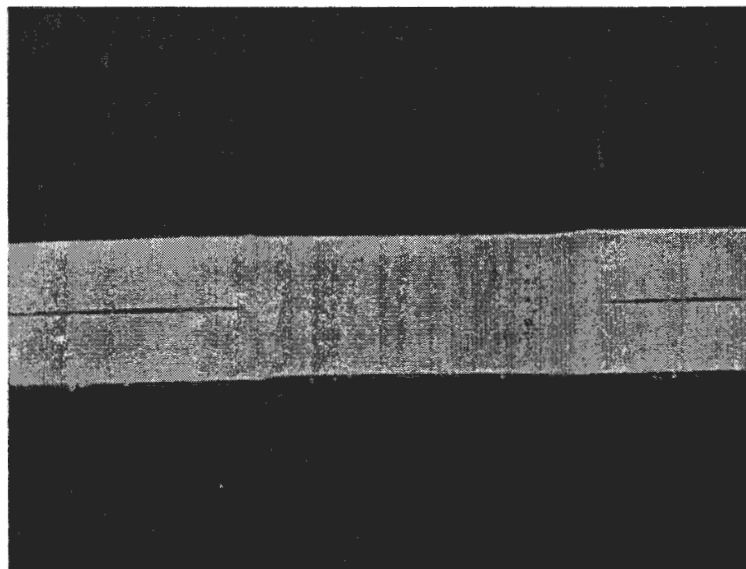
Macrograph of a spot weld peel specimen welded using improved conditions by Aerotek; magnified 9×, etchant: 1% nital.
